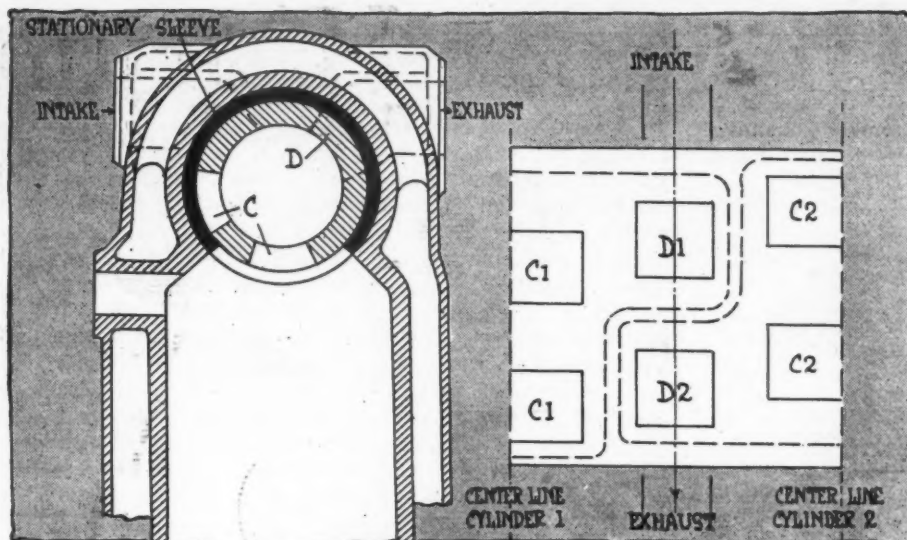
Type of valve in which the interior forms part of the combustion chamber.
